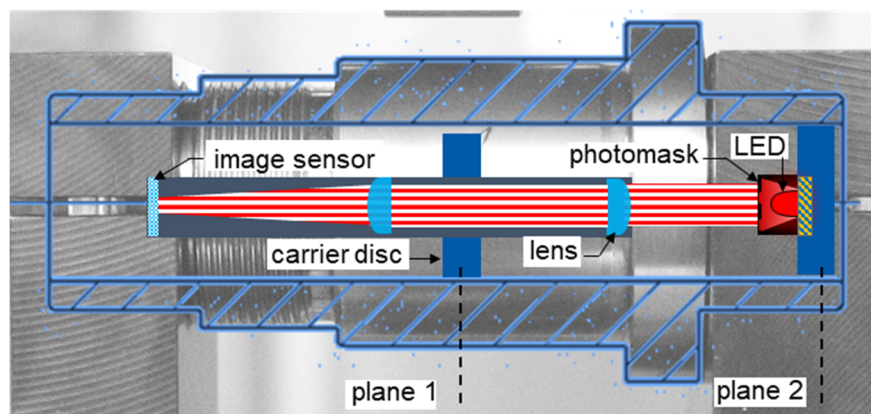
Sensor installation inside the pin of the bending roll [O5].
